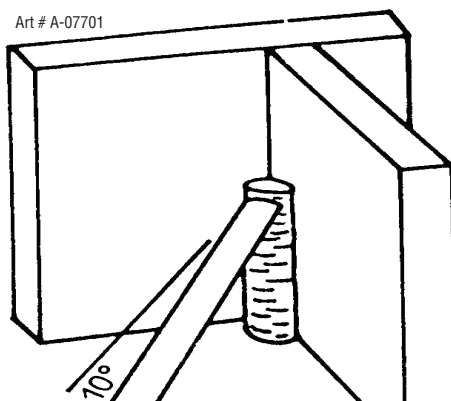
Single Run Vertical Fillet Weld
